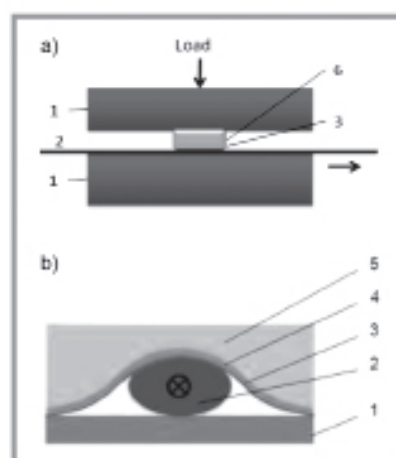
Idea of the damping element in a yarn tensioner a) tensioner, b) blow-up of the friction point in a) cross-section: 1 – metal plates, 2 – yarn, 3 – protective, wear resistant layer, 4 – bag wall, 5 – damping medium, 6 – bag containing the non-Newtonian fluid.
